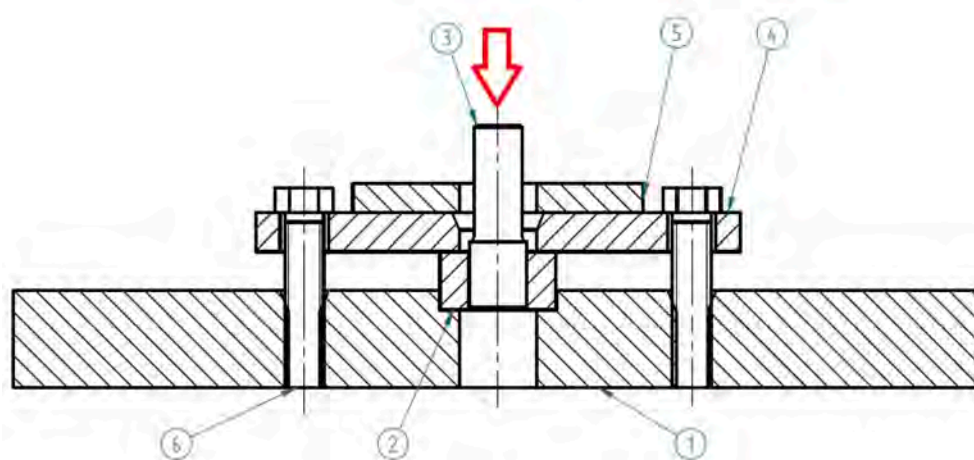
Cross sectional view of the test fixture: (1) Plate, (2) Collar, (3) Pin, (4) Cover, (5) Rubber block, (6) M14 screw. The red arrow indicates the side of impact with the end-impactor (not to scale).
